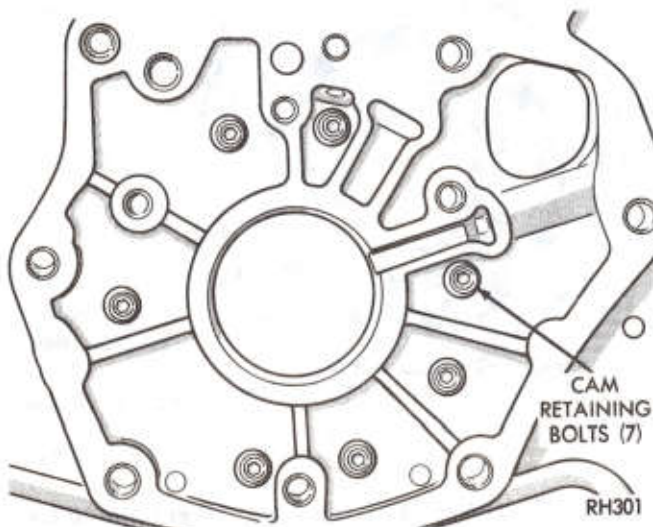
Cam Retaining Bolts (A-904T and A-999)
